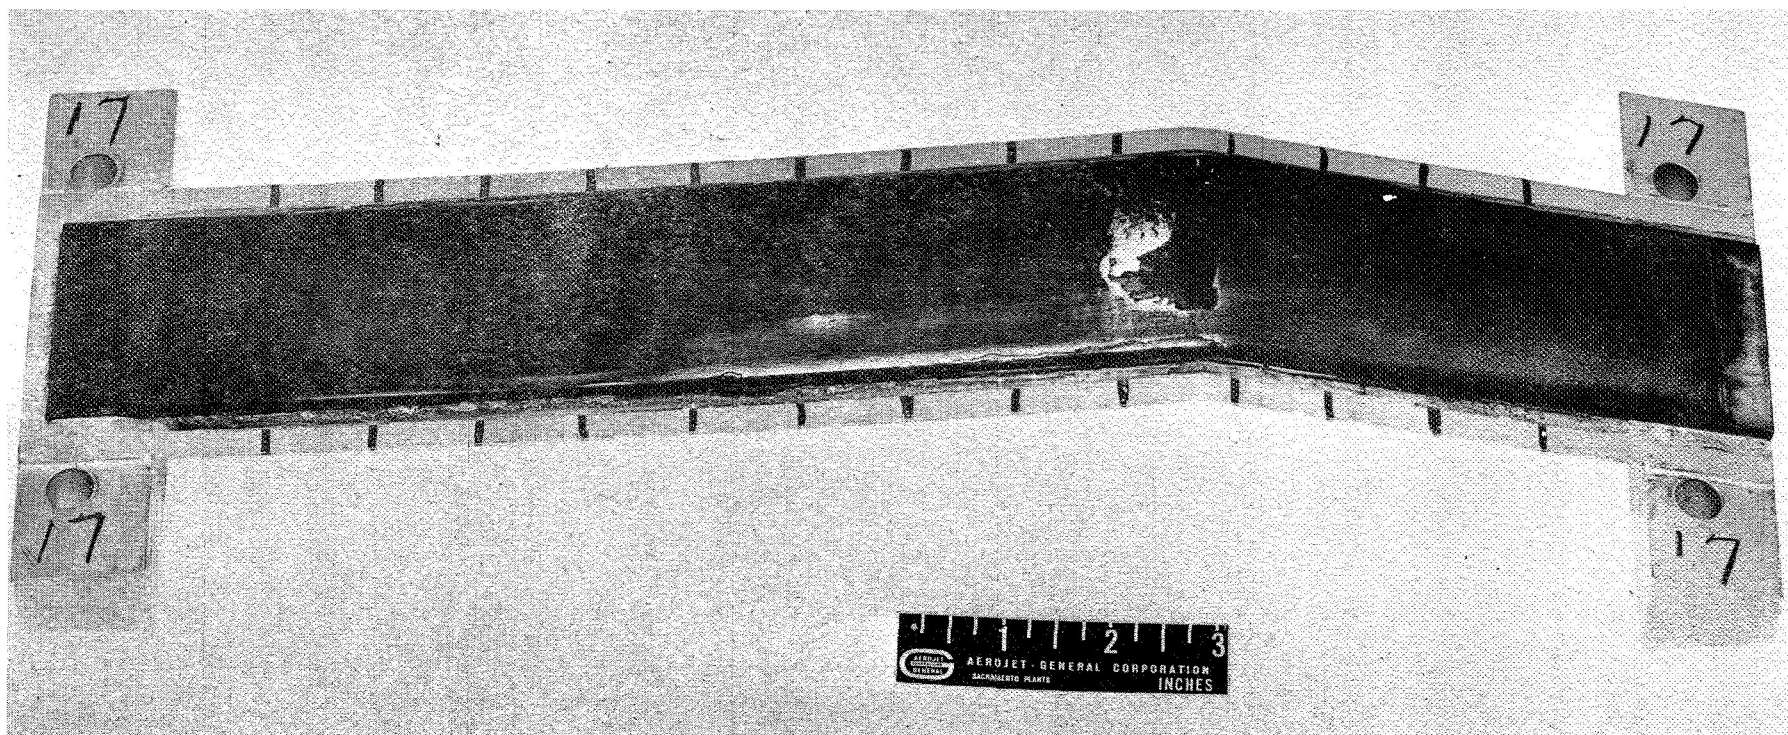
Post-Fire Condition of Specimen No. 17 after Exposure to Tests 012 (8 sec) and 013 (15 sec)
